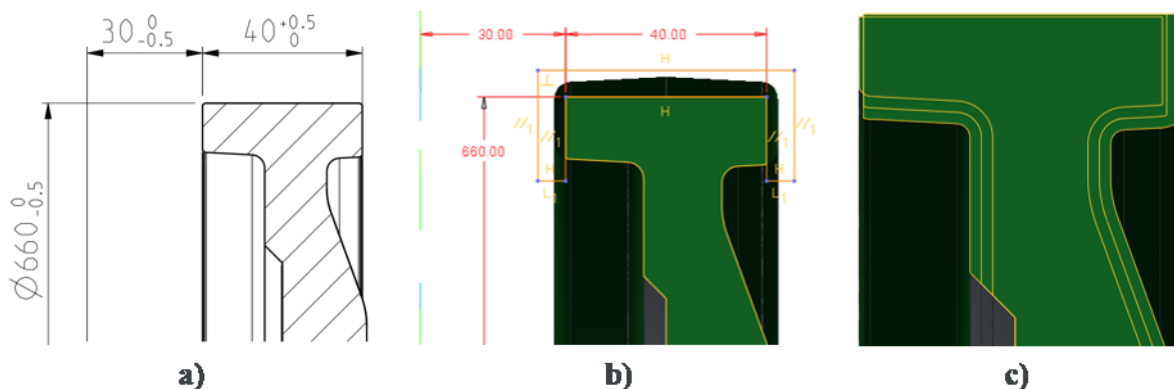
Brake surface machining tolerance modelling. A) drawing indication, b) sketch definition, c) tolerance model comparison.
